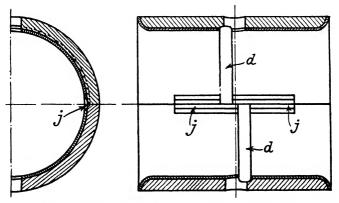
PART OF DORMAN UNFLANGED BEARINGS, WITH WHITE METAL FACES
